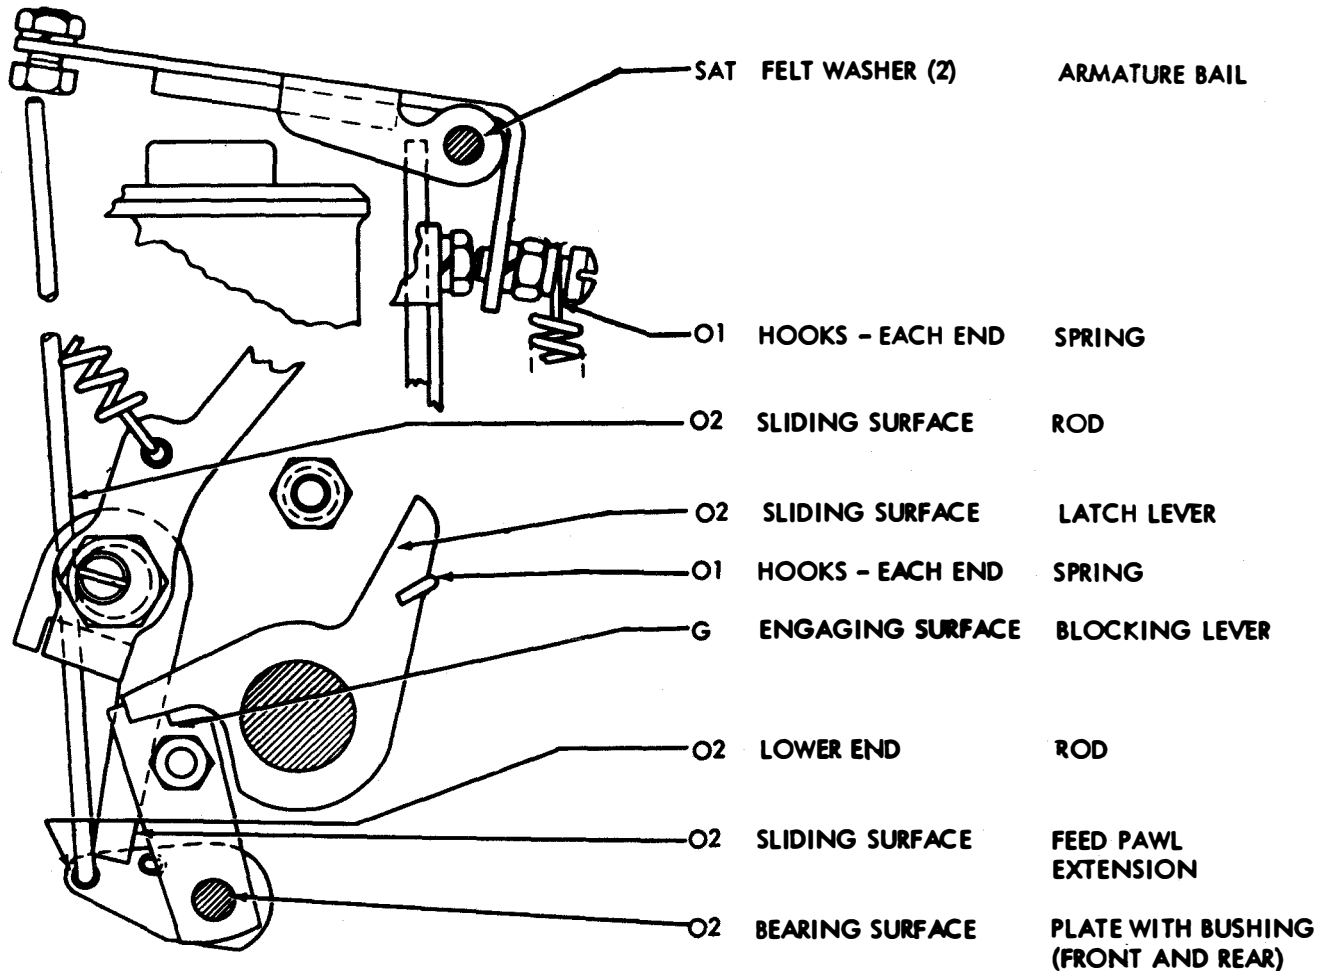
Blank Delete Mechanism (Sheet 1 of 2)
